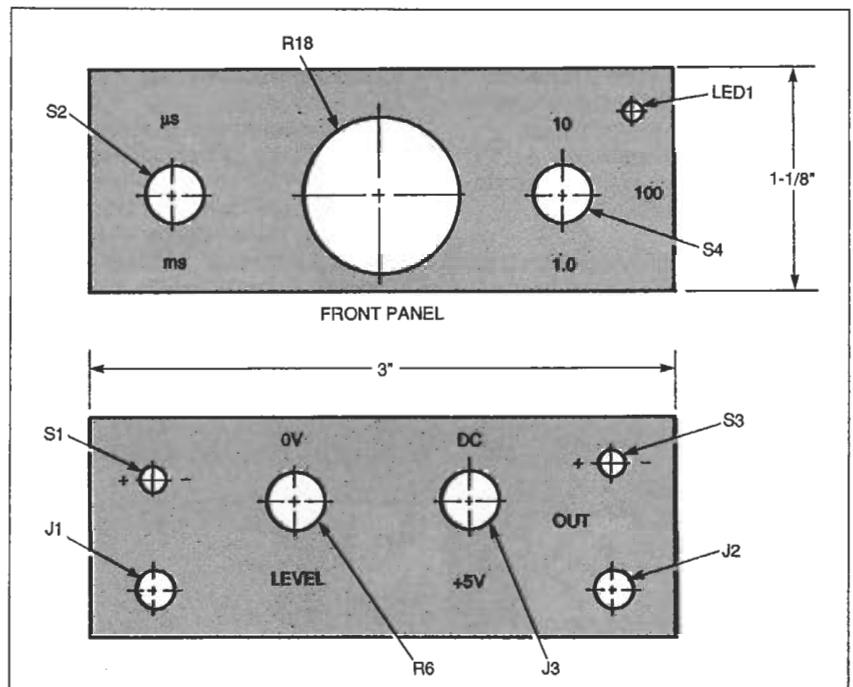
DRILL PATTERN AND LABELS for the end panels of the lower half of the project case.
